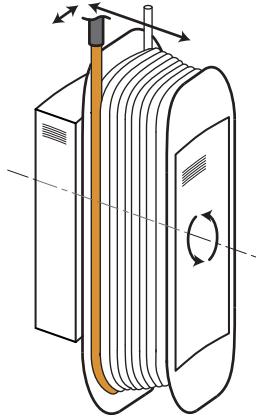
A linear wound stator tooth, where a rotation of the workpiece is the primary motion, and the wire-nozzle has 1-2 degrees of freedom to control the placement of the wire.
